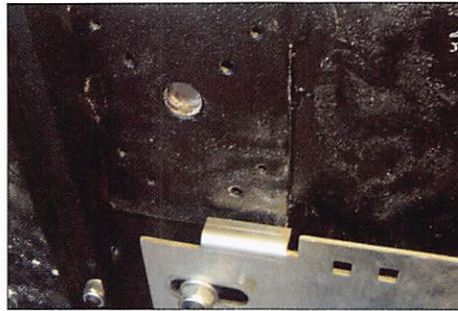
shows the inside lock mounting plate, here again note the two different sets of holes. The square set is for the original lock.
